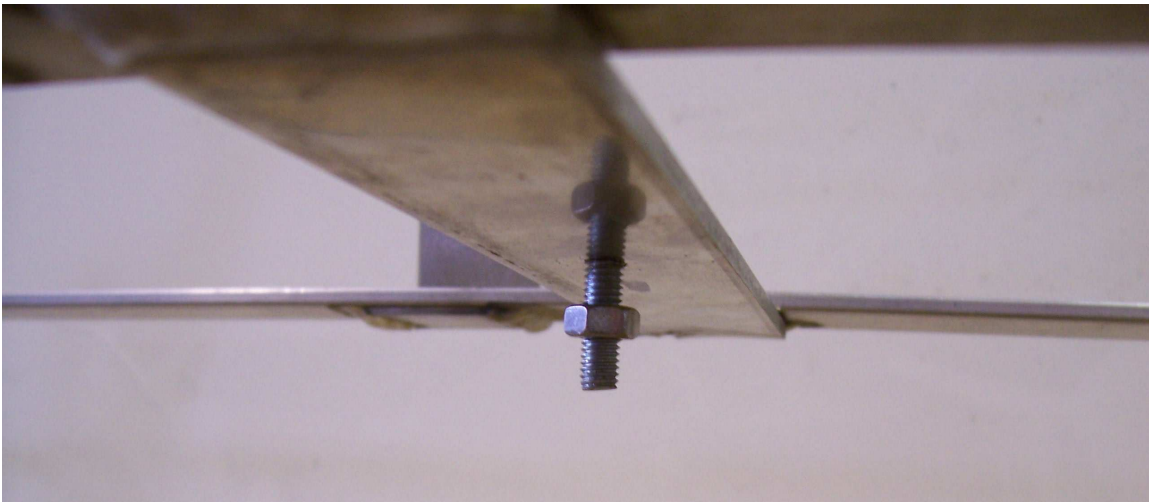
The kingpin assembly with the nut further up the screw for illustration purposes.
